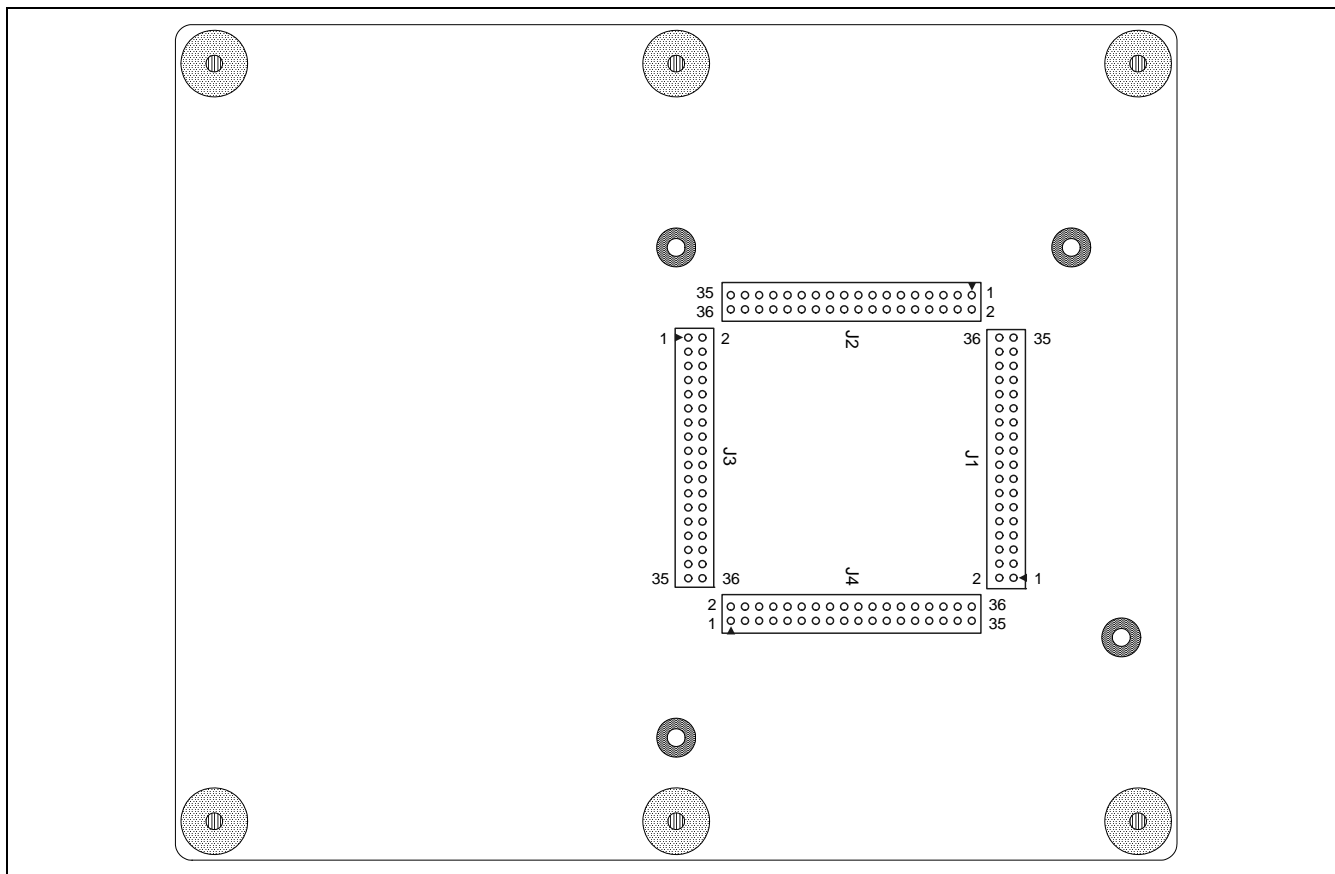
Common Ring Connector Pin Assignments (Top view of the component side)
